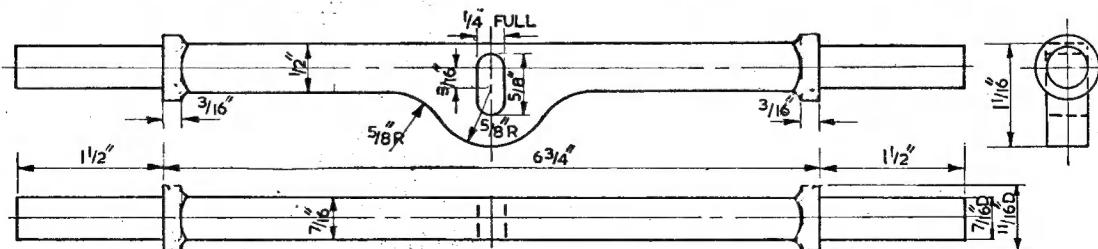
Front axle for $1\frac{1}{2}$ -in. scale "Big Lion"
